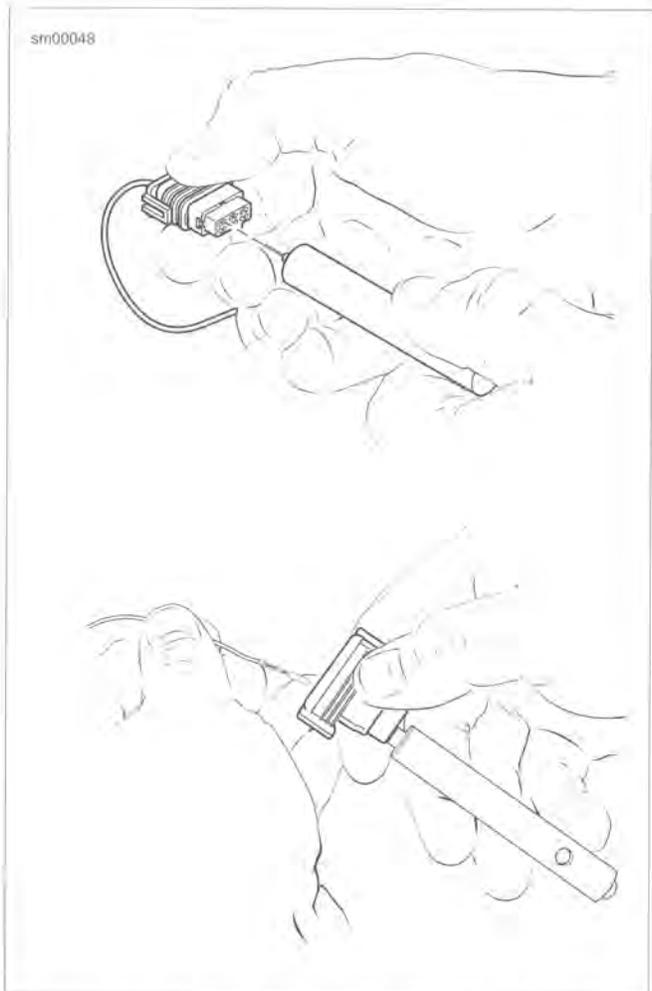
Delphi Micro-64 Sealed Connector: Insert Tool and Remove Terminal
